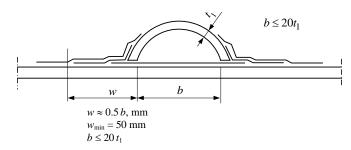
Stiffeners with void core or made from non-structural materials
